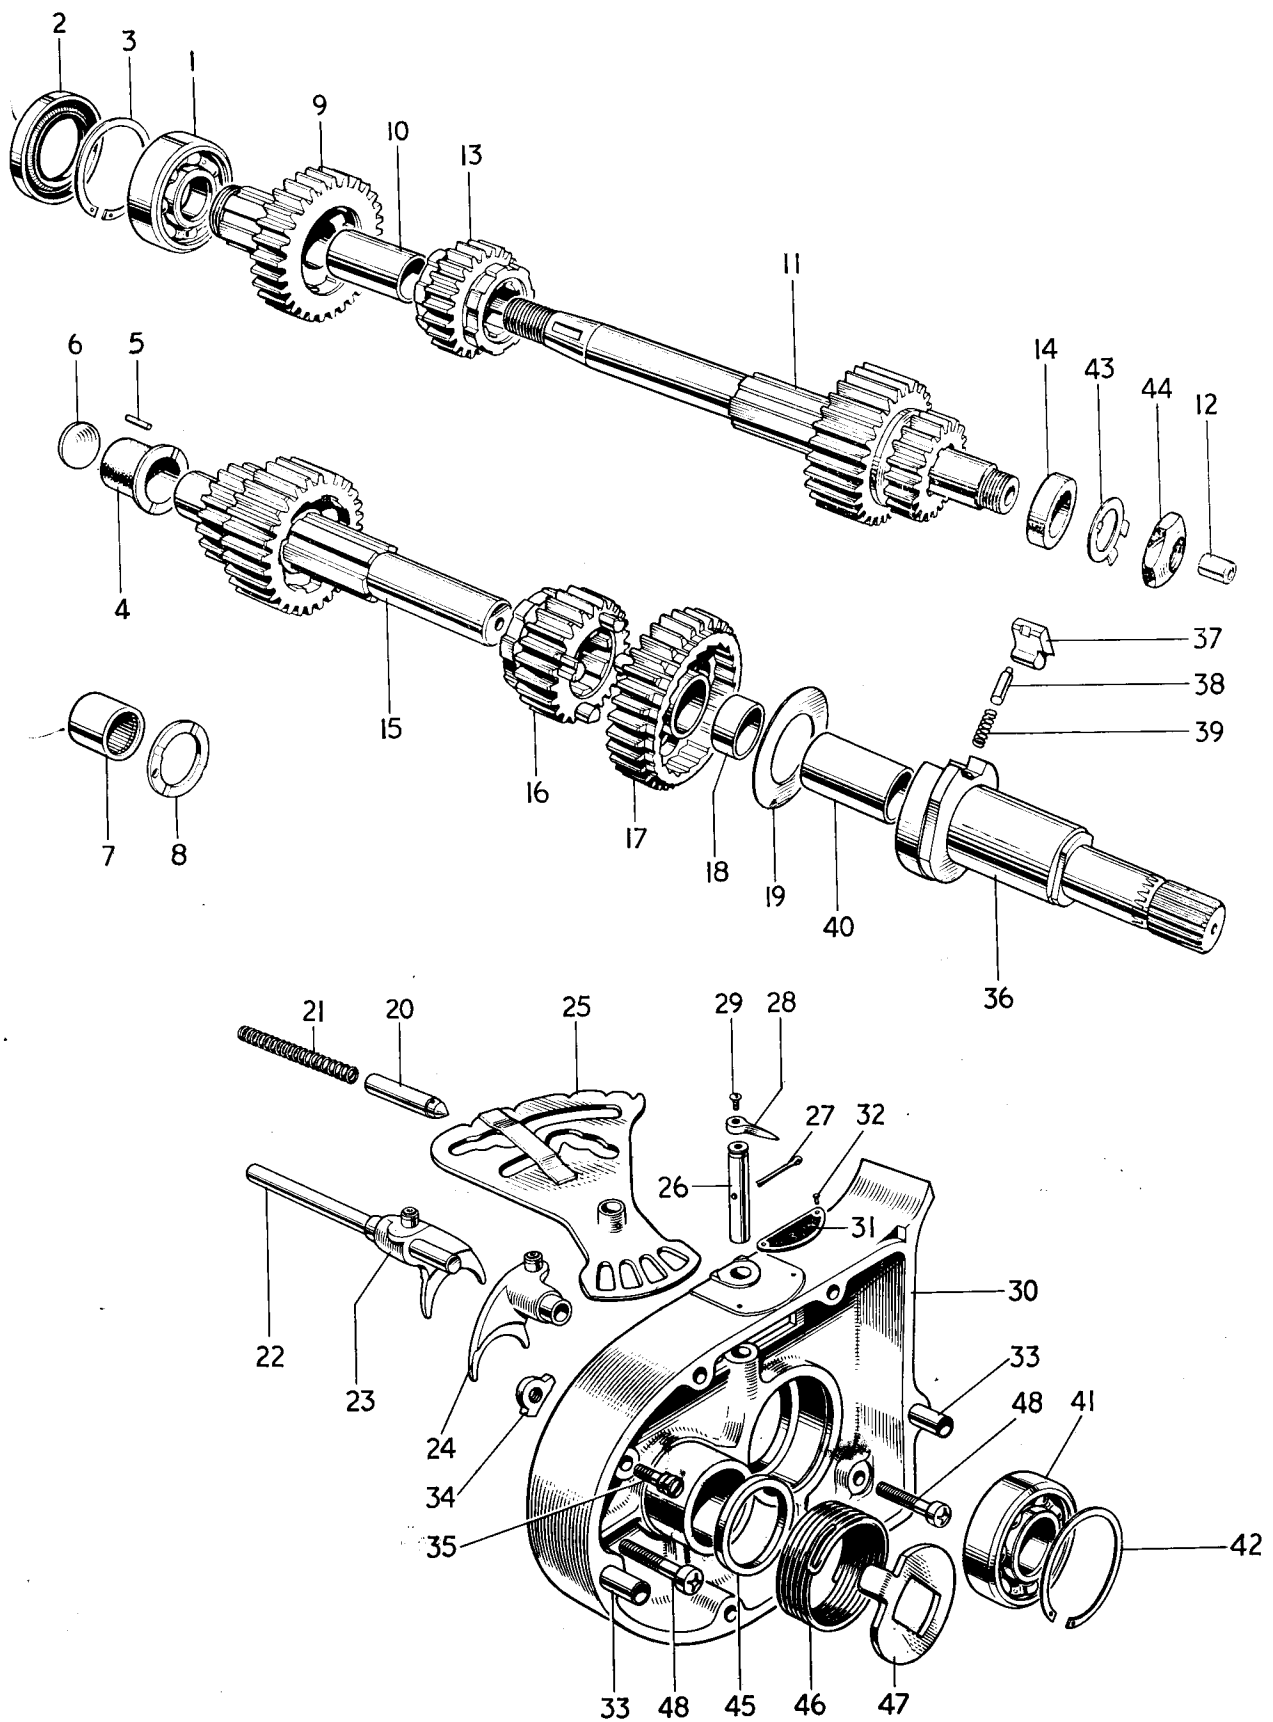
GEARBOX SHAFTS, BEARINGS AND INNER COVER
